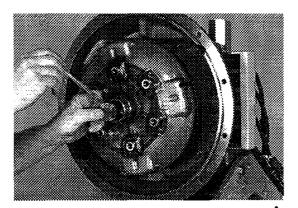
With new "O"-ring in place, install bore plug in converter assembly.
